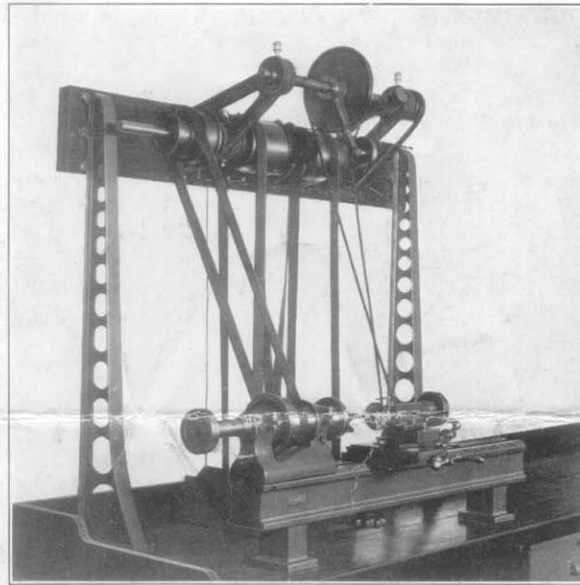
Rivett Series 507 lathe, external grinding attachment, on bench with Countershaft Plank Supports, Wall Countershaft with Grinding Countershaft Attachment, ball-bearing
